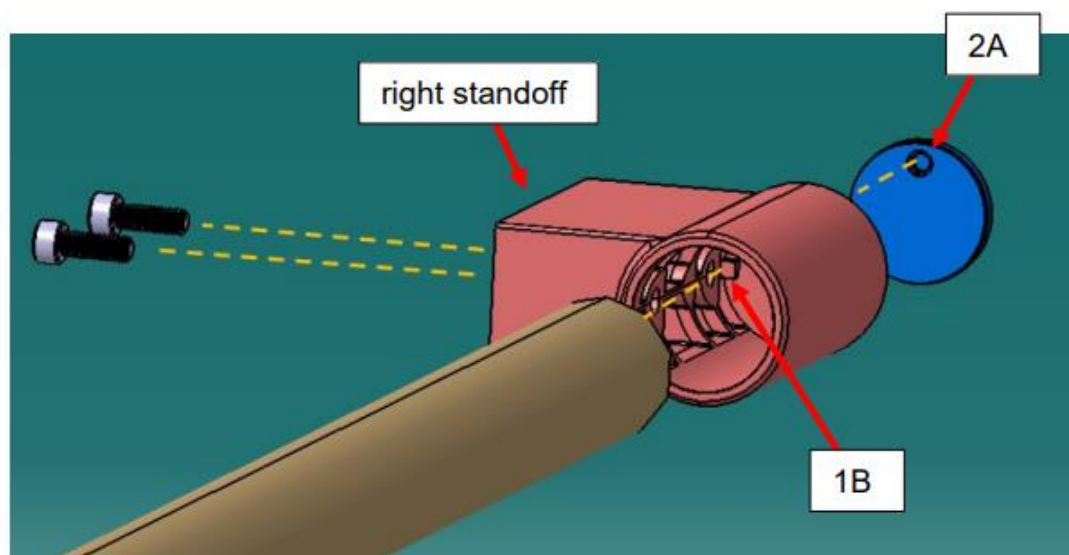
A perspective view of an embodiment of the invention showing protrusion and recess
